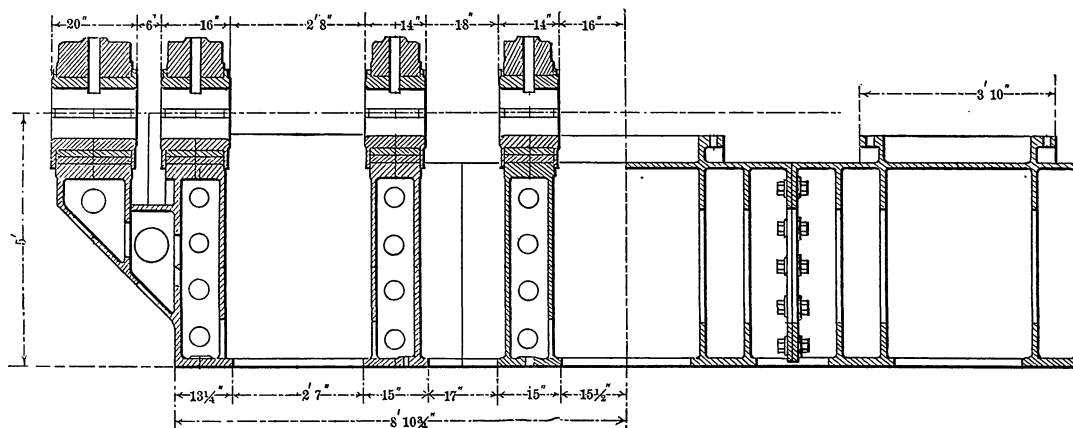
Longitudinal Section of Engine Bed Plate.
